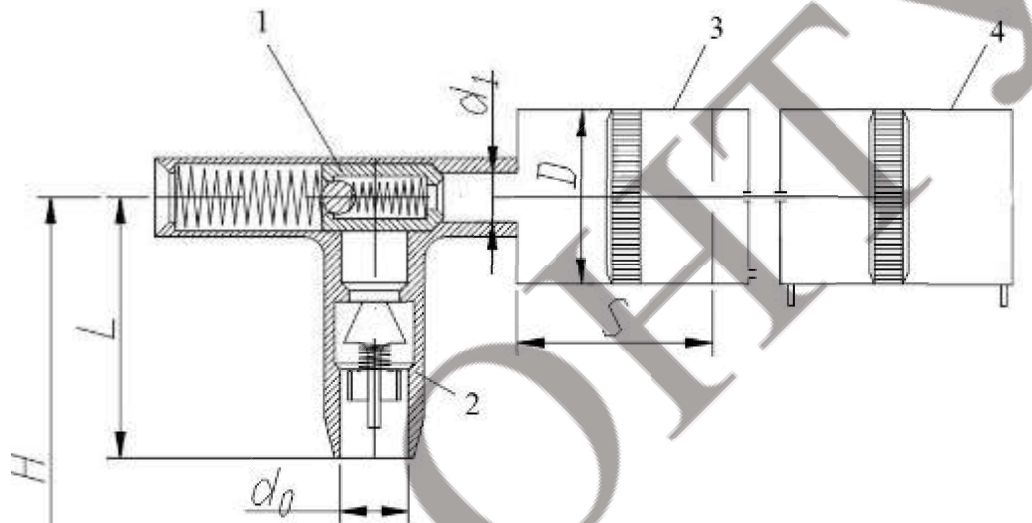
The scheme of the piston batcher: 1 – locking element; 2 – outlet pipe; 3 – dosing cylinder; 4 – pneumatic cylinder
